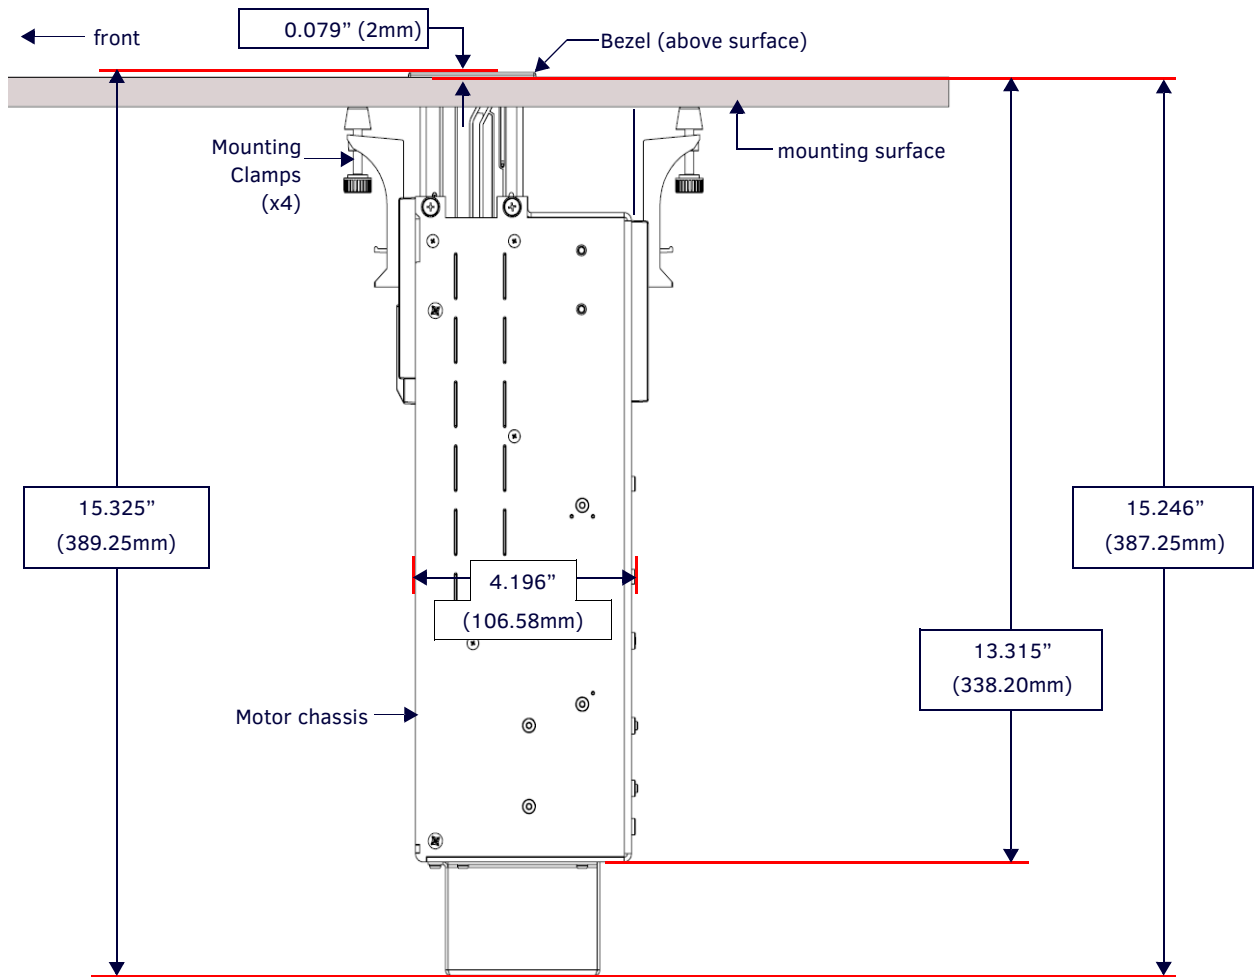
Dimensions of the MXR-1001 (side view, below the mounting surface)
